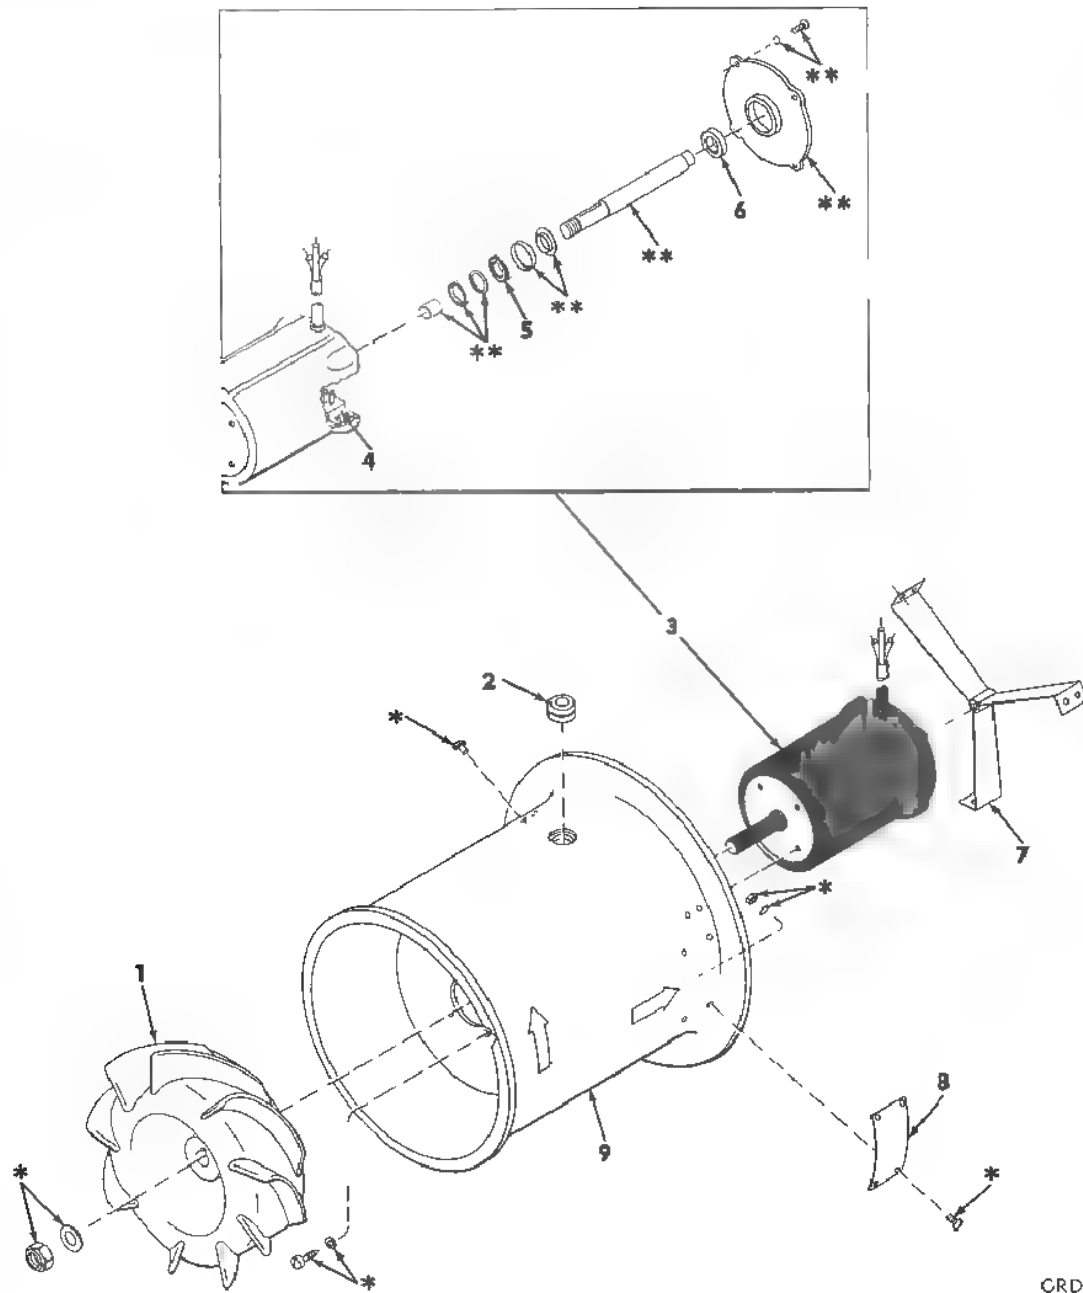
FAN, VANEAXIAL /8517073/-EXPLODED VIEW
